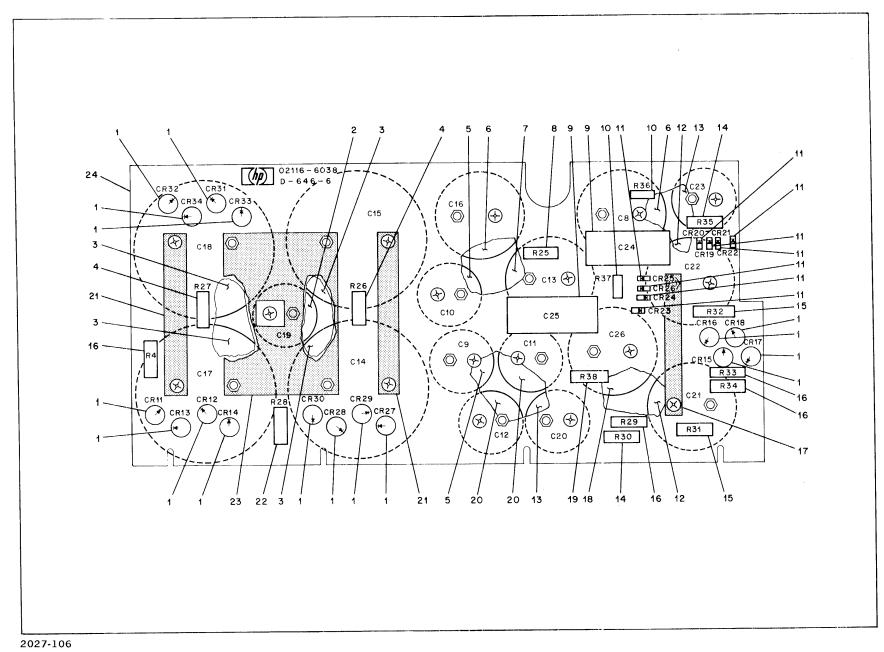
A303 Capacitor Board Assembly, Parts Identification Diagram
